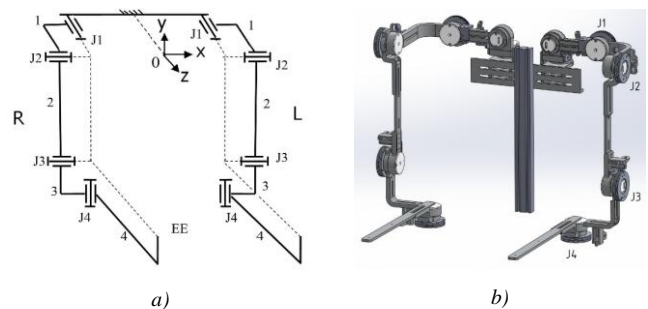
Exoskeleton arms: a) mechanical structure; b) CAD view of the prototype.
